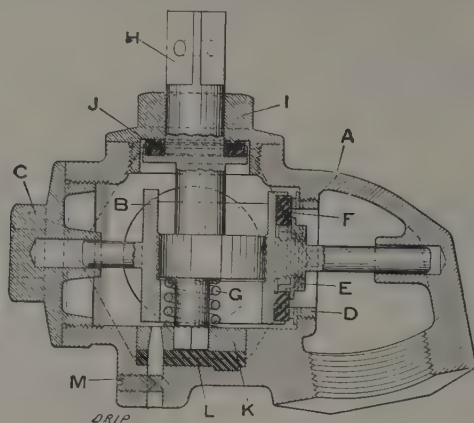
Gold Acme End Valve No. 1126—Sectional View.
